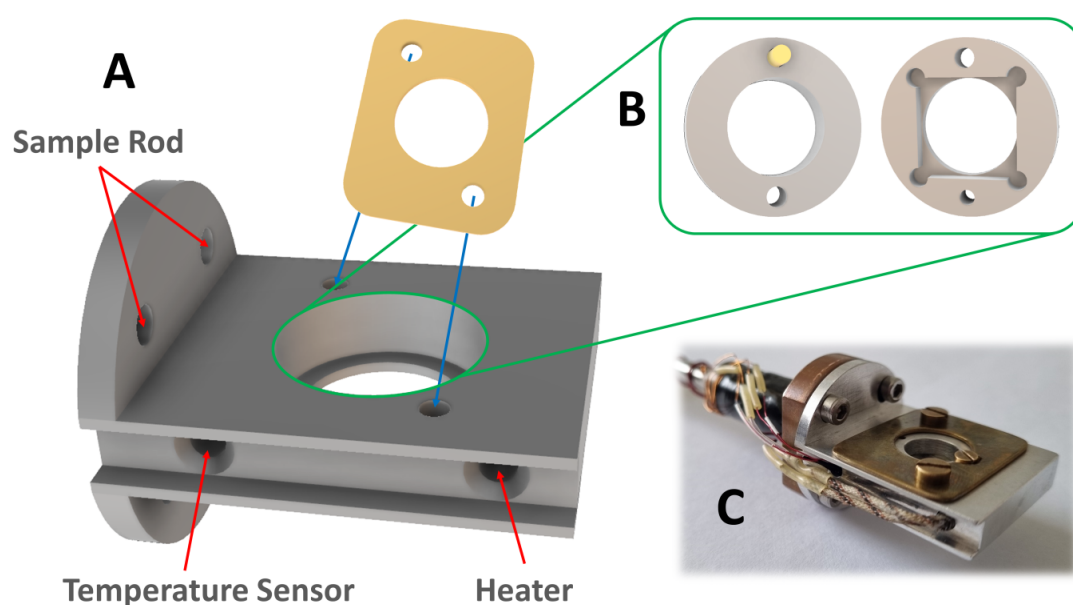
Drawing of the sample holder (A) with recesses for the sample compartment shown in the green box (B), the temperature sensor and a heater. (C) Picture of the assembly. A screw through the holes in the bottom of the two parts closes the two pieces in (B) while the brass pin that goes into the upper hole of the part on the right prevents the two pieces from rotating against one another. These pieces are designed for $(10 \times 10) \text{ mm}^2$ samples with a thickness of 1 mm.
